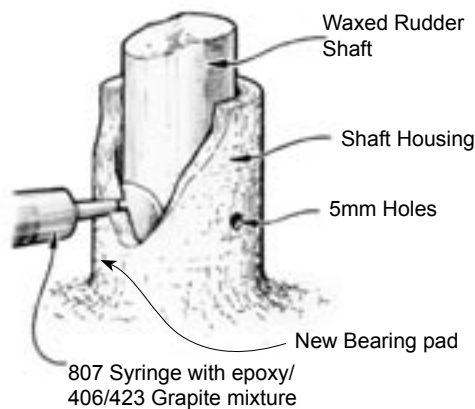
Inject enough of epoxy/406/423 mixture through the drilled 5mm. diameter ports to form a 20-25mm. diameter pad between the shaft and housing at each port.
